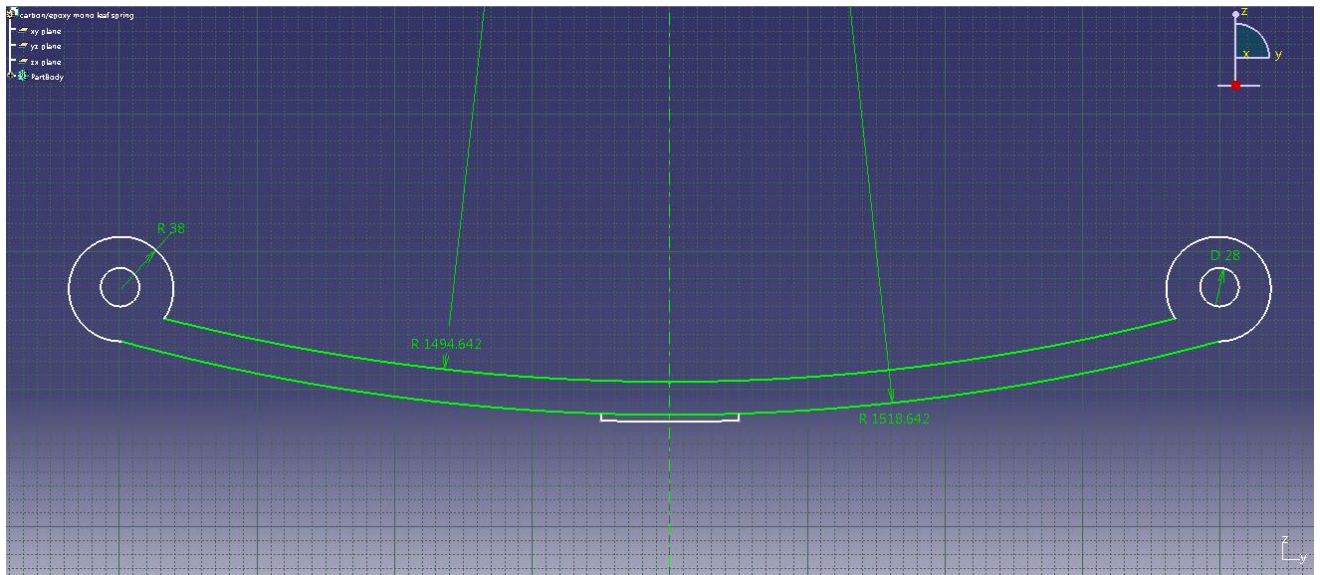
2D drawing of mono carbon/epoxy leaf spring using CATIA V5 R19.
